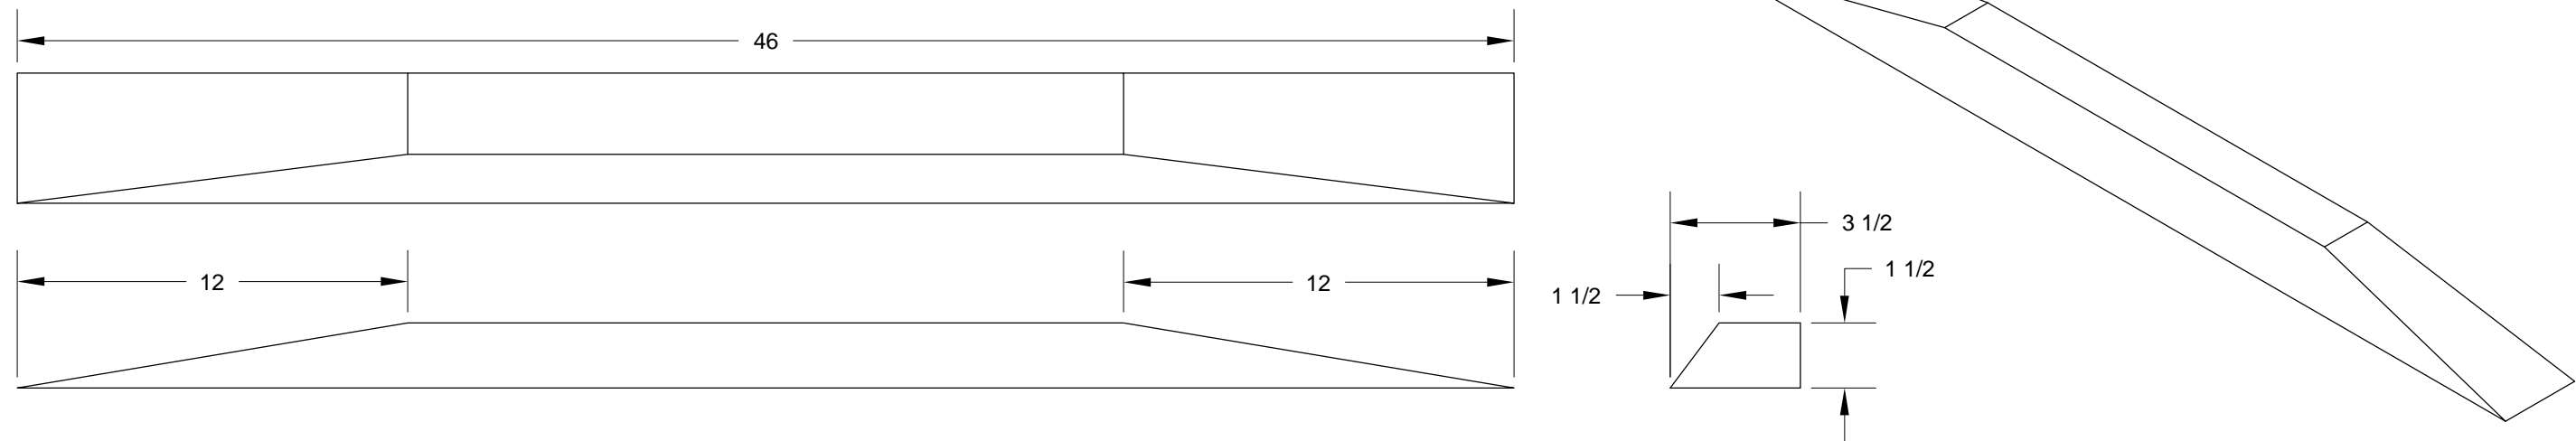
FABRICATING THE CLAMPING BLOCK
